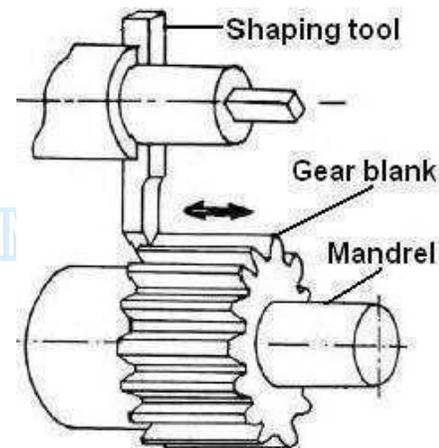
Gear teeth cutting in ordinary shaping machine
